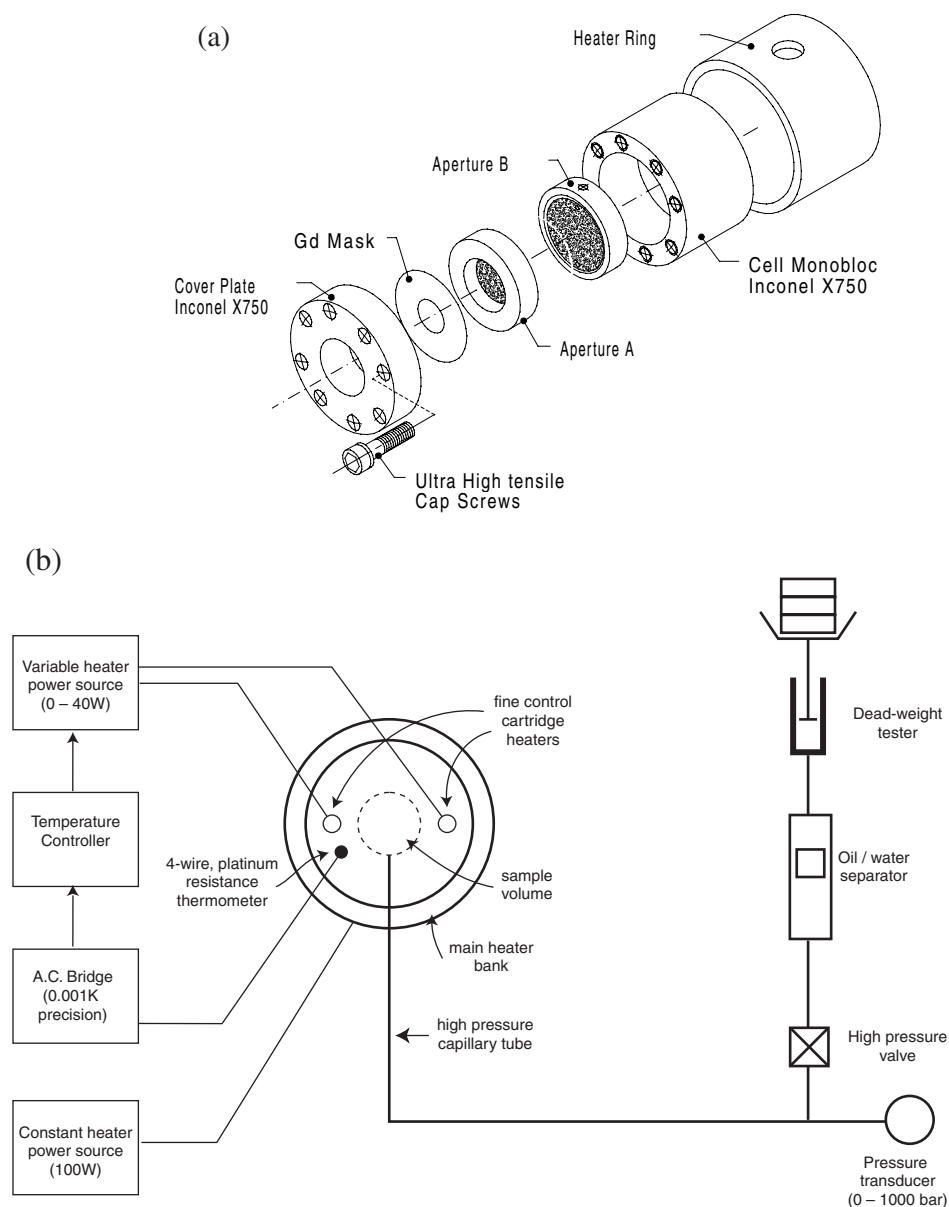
(a) Exploded view of sample container. (b) Schematic view of sample environment.
